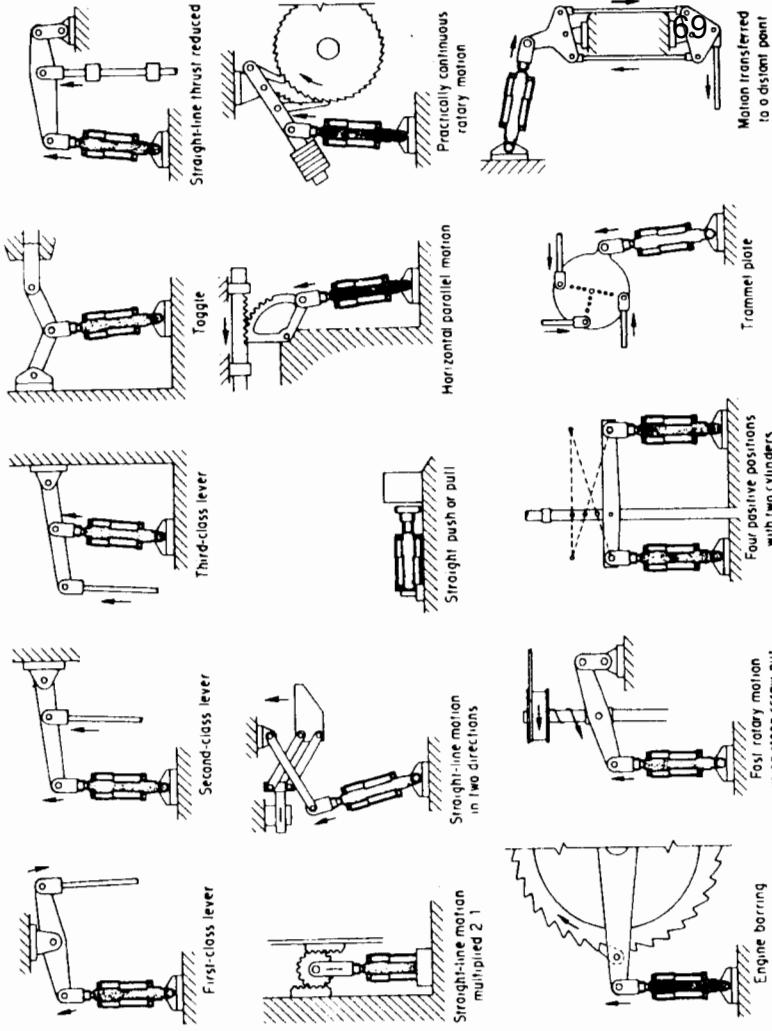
Typical mechanical linkages that can be combined with hydraulic cylinders. (Courtesy of Rexnord Inc., Hydraulic Components Division, Racine, Wisconsin.)
